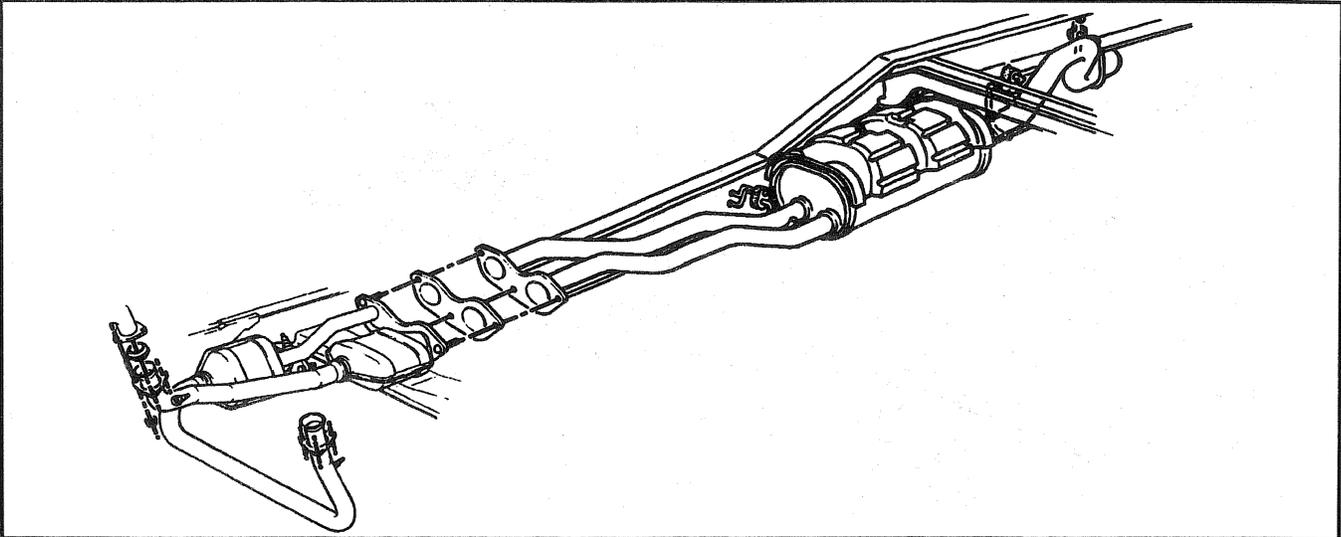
Exhaust System - C/K 1 and 2 Extended Cab Short Box w/5.7L Engine Under 8600 lb GVWR
